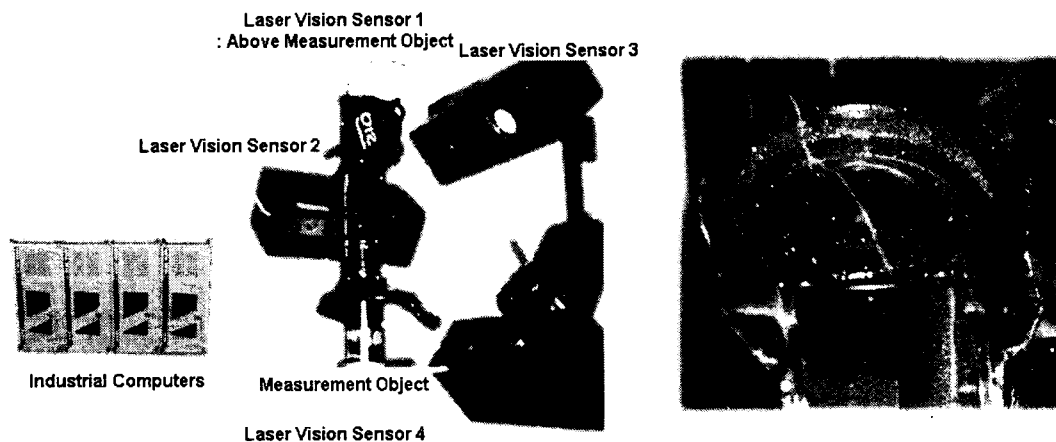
Configuration of bead inspection system using laser vision sensor
